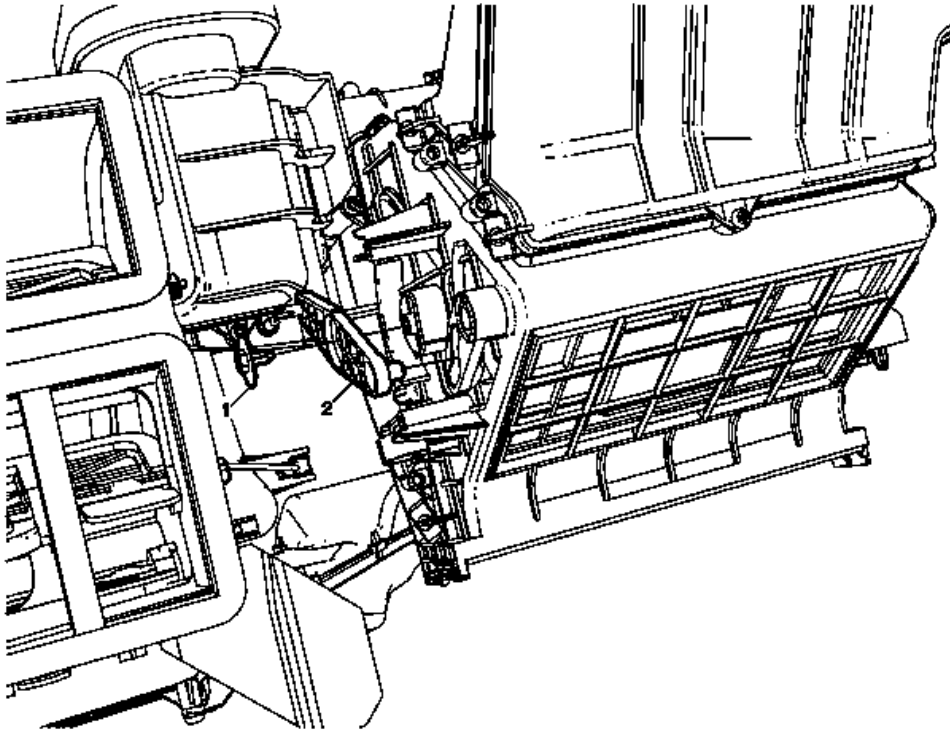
Air Inlet Valve Link (Left Hand Drive)
